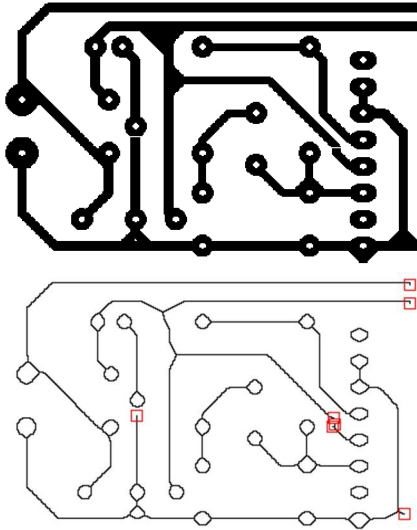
PCB with defects and skeleton with their coordinates
